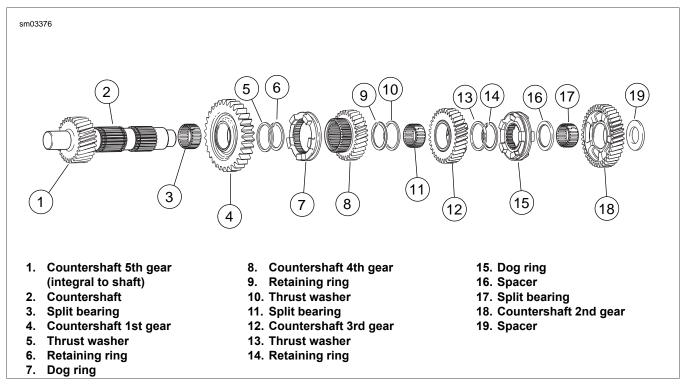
Transmission Countershaft Assembly Once Removed from Left Crankcase/Disassembly
